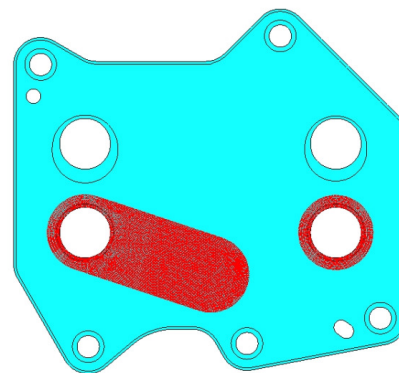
Five bolt holes at the periphery of the baseplate are utilized for clamping the EOC to the test fixture.
